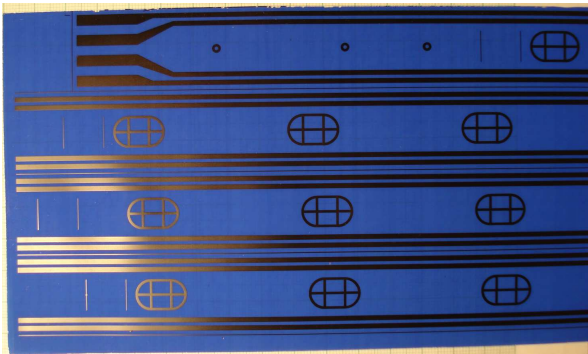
This picture shows the circuit of the beta detector connection printed on the transfer sheet. The oval shapes are marks to later cut out holes in the circuit board. These holes then enable you to feed the circuit board onto the rod of the feed through.
